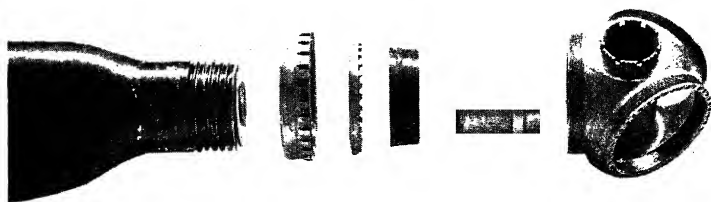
DETAILS OF ROOT FITTING OF MAGNESIUM BLADE.
